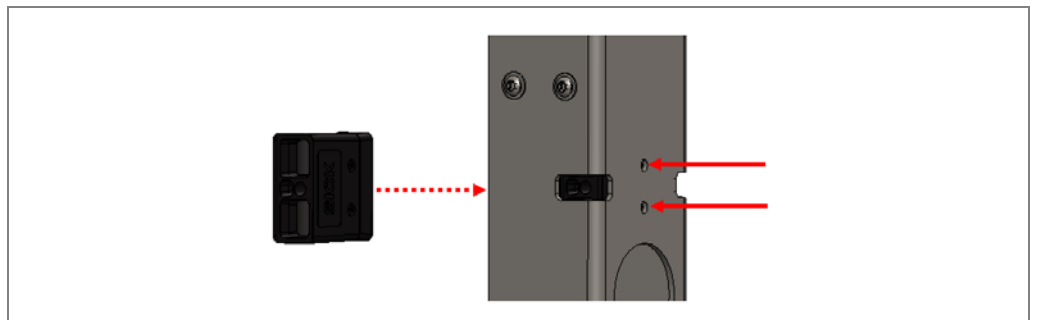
Steel frame: screwing QuickFix brackets for holding the MLG to the bar
